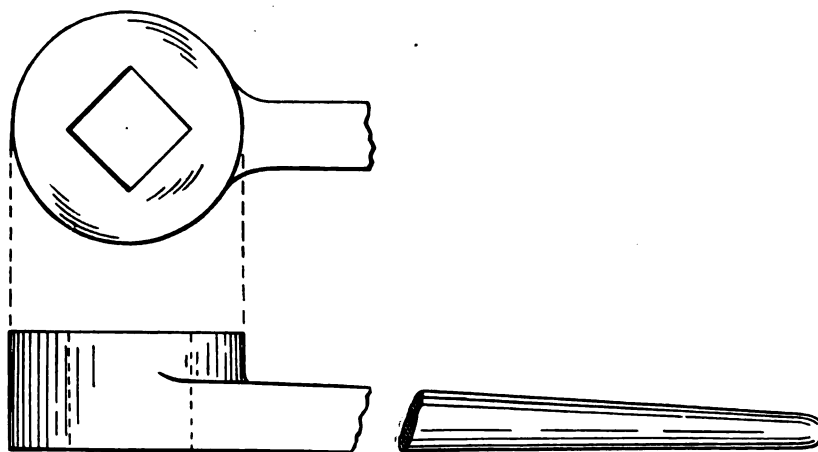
FORGING FOR AN ASH PAN SHAKER.
